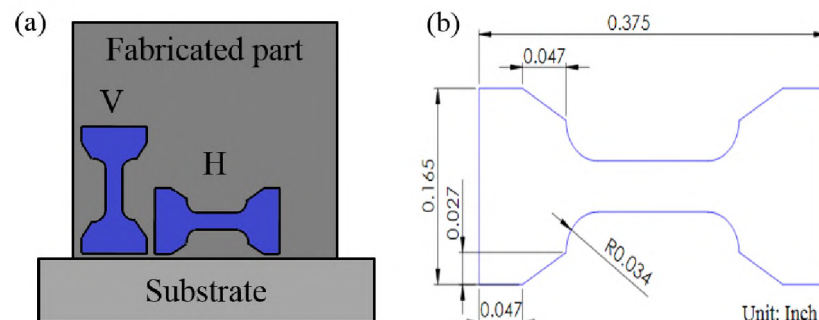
(a) Side-view of a part made by LFP and SLM showing how the horizontal and vertical tensile specimens were extracted and (b) dimensions of the tensile specimen.
